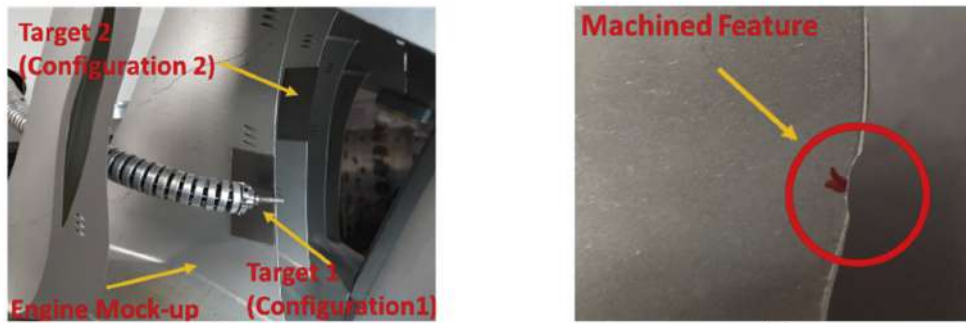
Continuum Robot machining an aluminum work-piece [9]
